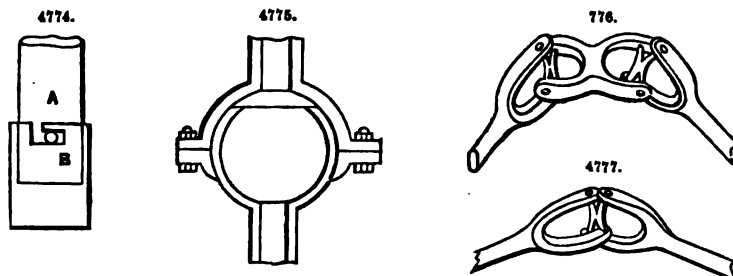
, a ball-and-socket joint arranged for tubing. Figs. 4776, 4777, two kinds of universal joints.
